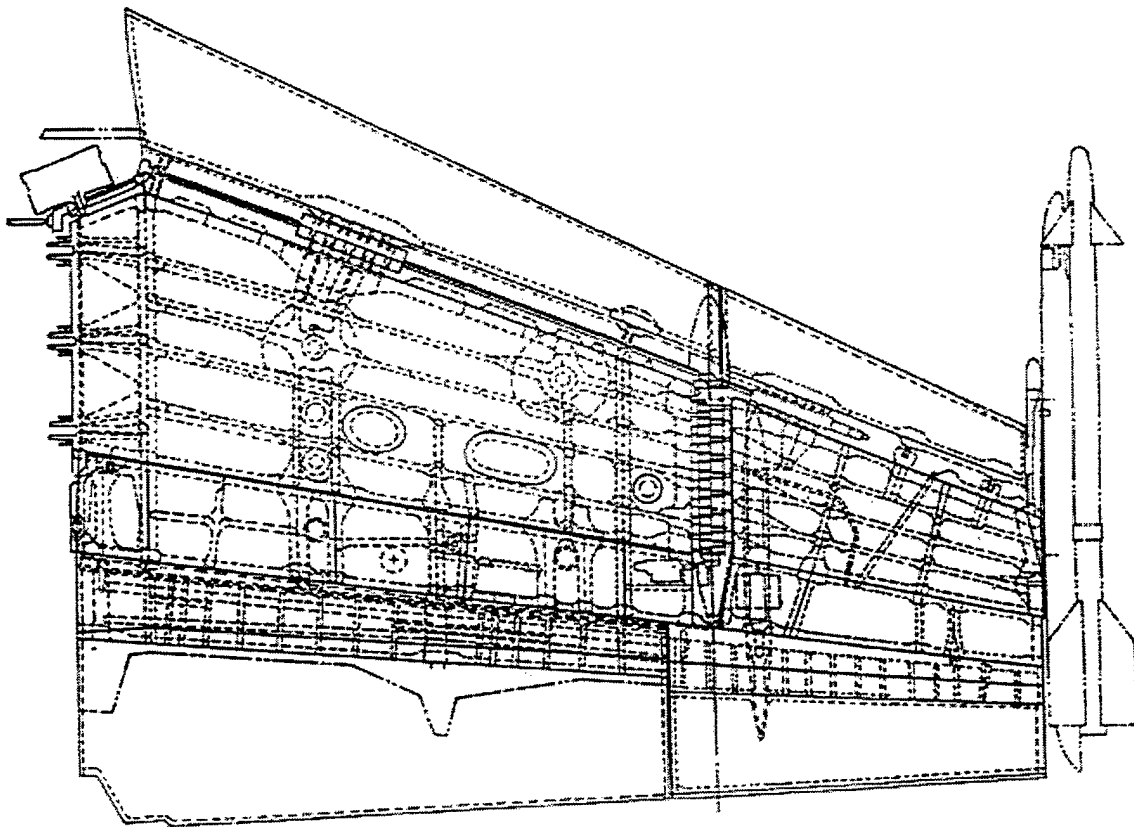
Assembly Drawing of the F/A-18 Wing with Detailed Wing Box Structural Elements, Control Surfaces, and Tip Missile Launcher
